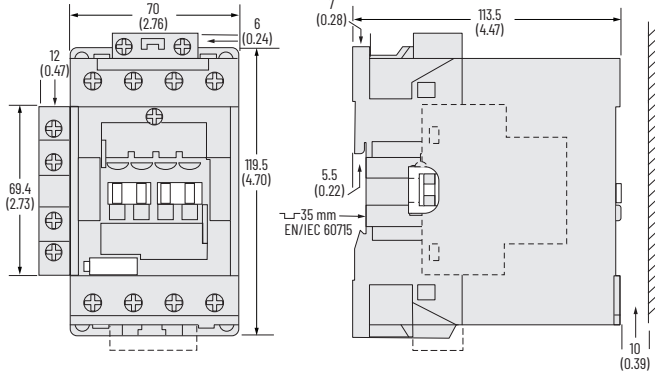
100-E80...100-E96 3-Pole Contactors with Side-mounted Auxiliary Contact
